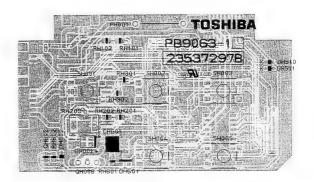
U0031 CAM Switch PC Board (Top Side)
